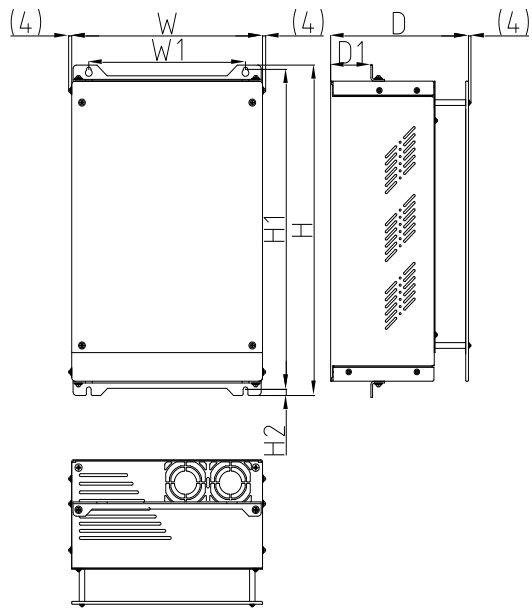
OPEN TYPE INSERTED DIMENSION
